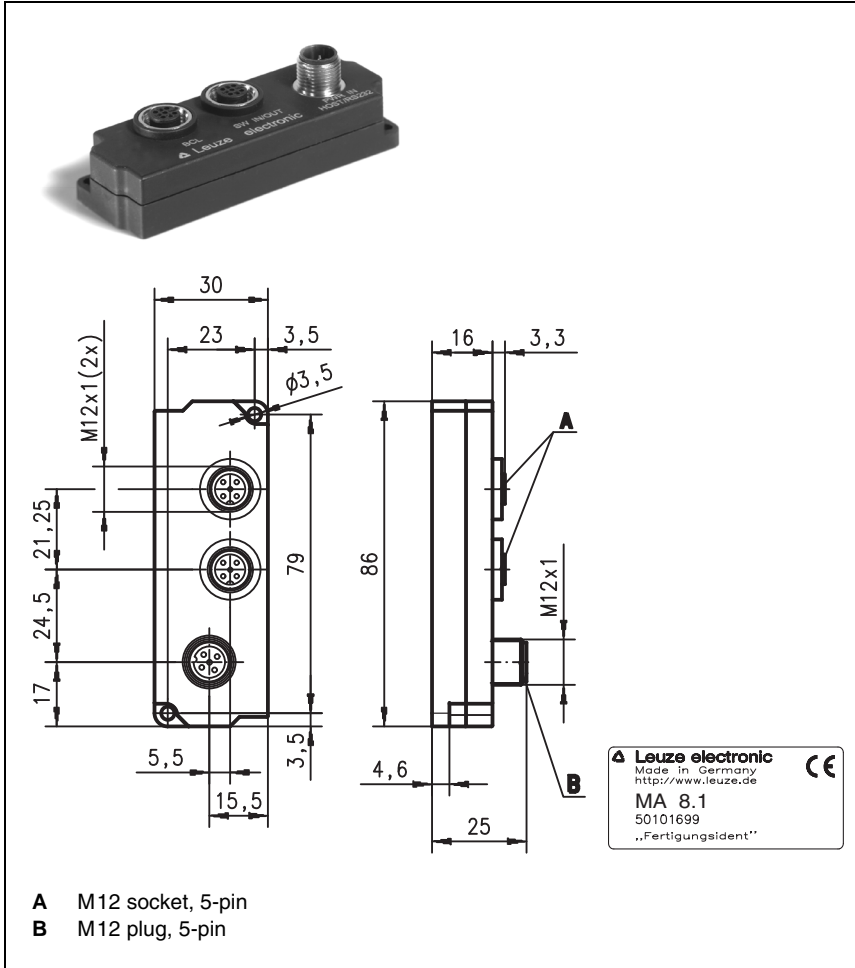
Photo and dimensioned drawing of the MA 8.1 connector unit
